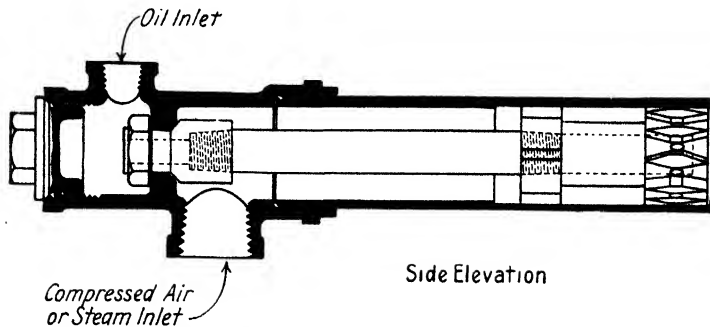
Venturi type of oil burner. (*Hauck Manufacturing Company.*)
